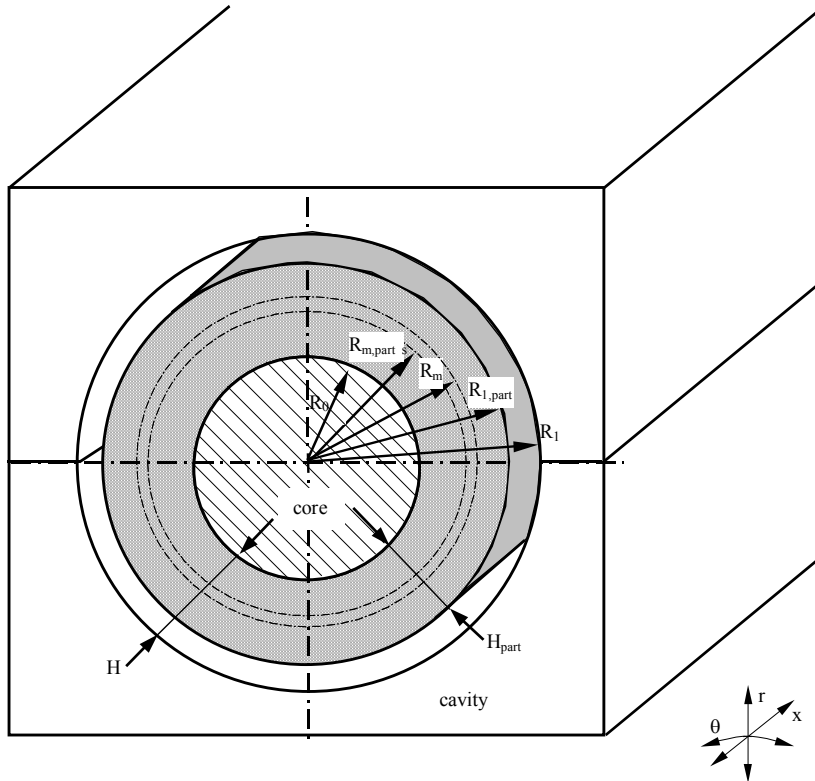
Schematic cross-section of part shrinking inside the mould
